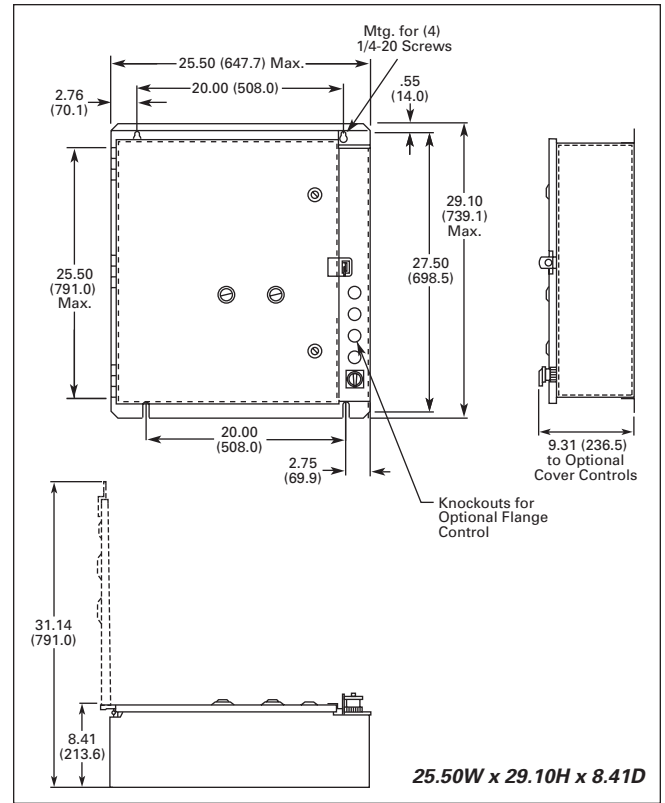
Box 9, Type 12 — Approximate Dimensions in Inches (mm)
